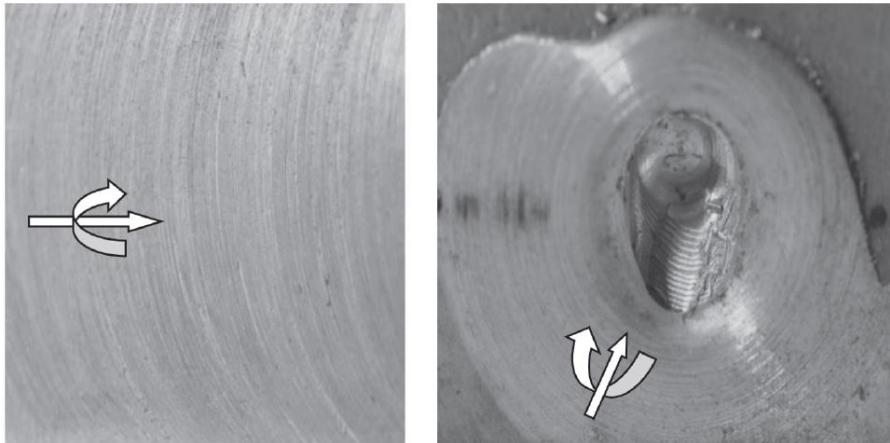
13 Welding surface (a), and the exit-point of the tool from the weld (b). Arrows indicate directions of rotational and welding speed
